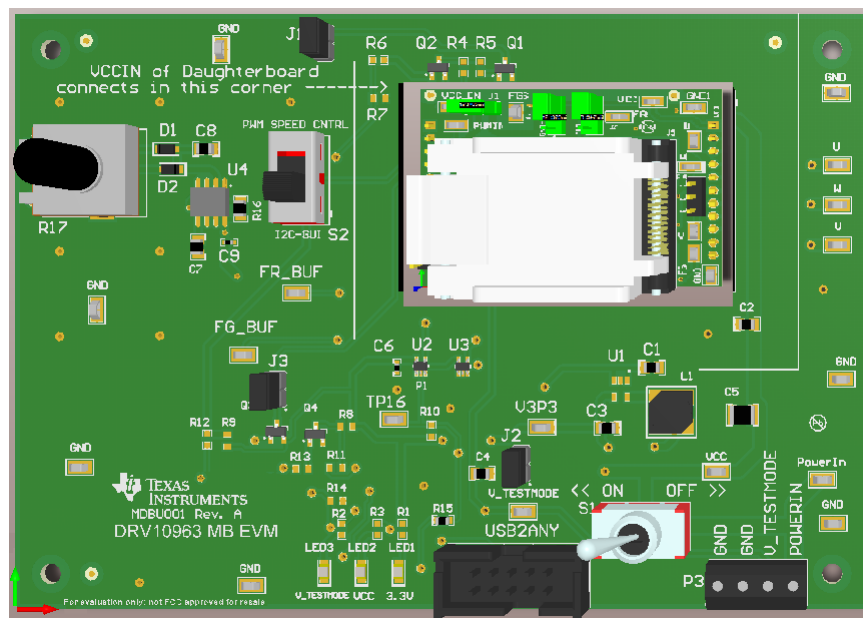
DRV10963 Motherboard with Socket Daughterboard Mounted on top
